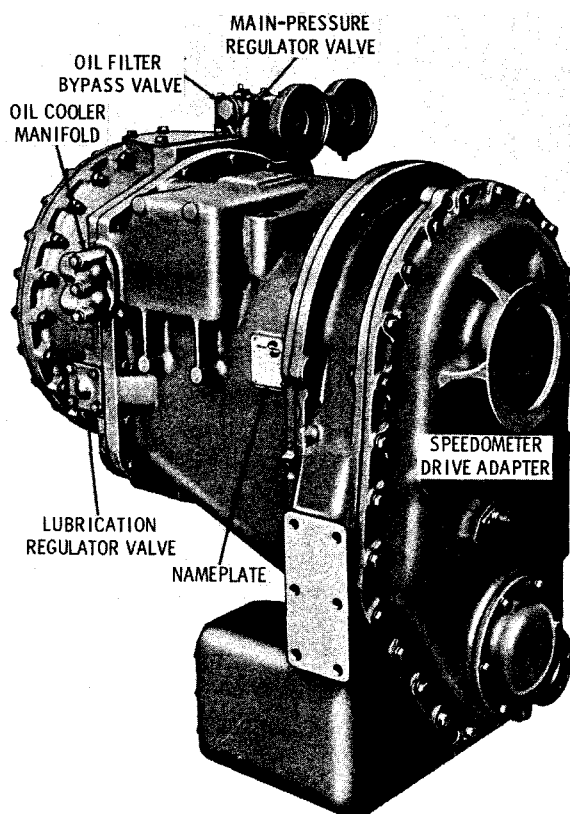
Model CRT 5631 transmission, remote mount—left-rear view
